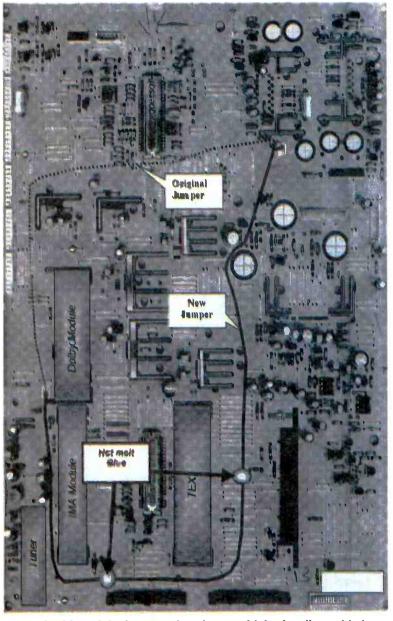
Position of the jumper wire, shown with broken line, added as a production modification with signals panel 23536538A in the C8SS chassis. Remove this jumper wire and instead fit a 480mm jumper wire as shown (solid line).
